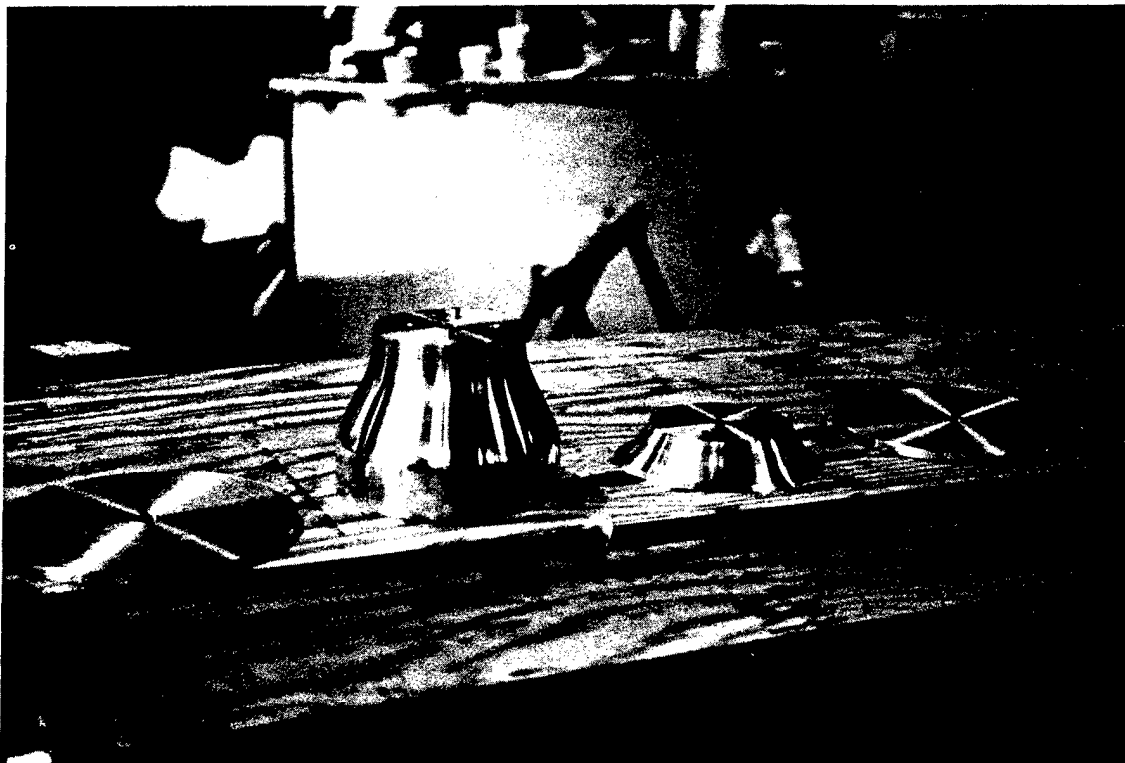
Photograph of the disassembled mold used to fabricate a composite suction bell.
